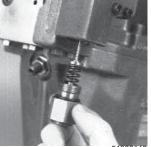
Install PCOR•PC Spring and Spool Valve
